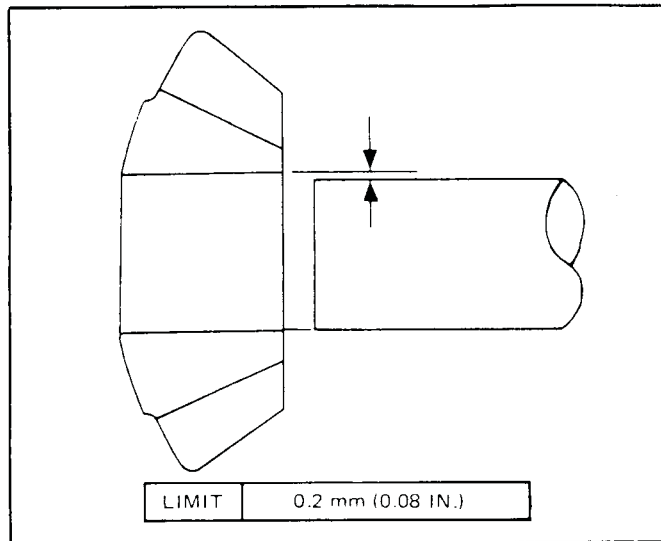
A-79 Pinion Gear/Cross Pin Clearance
